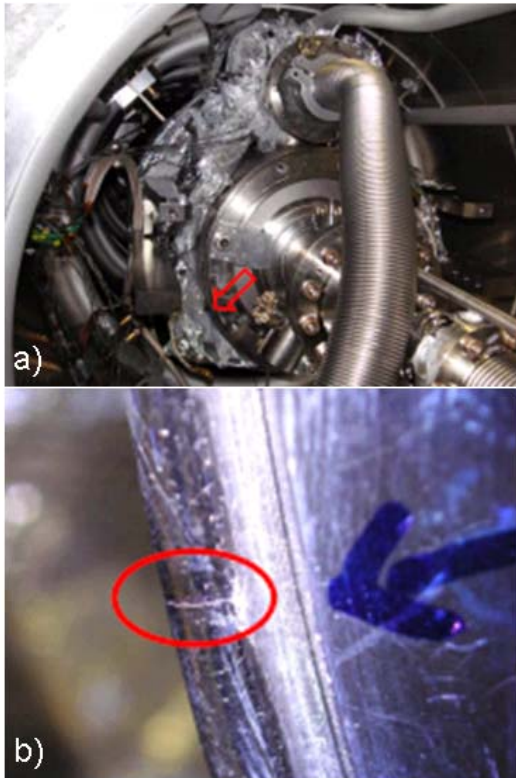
a) Booster cryomodule cavity inspection and b) localised Helium vessel leak location.
